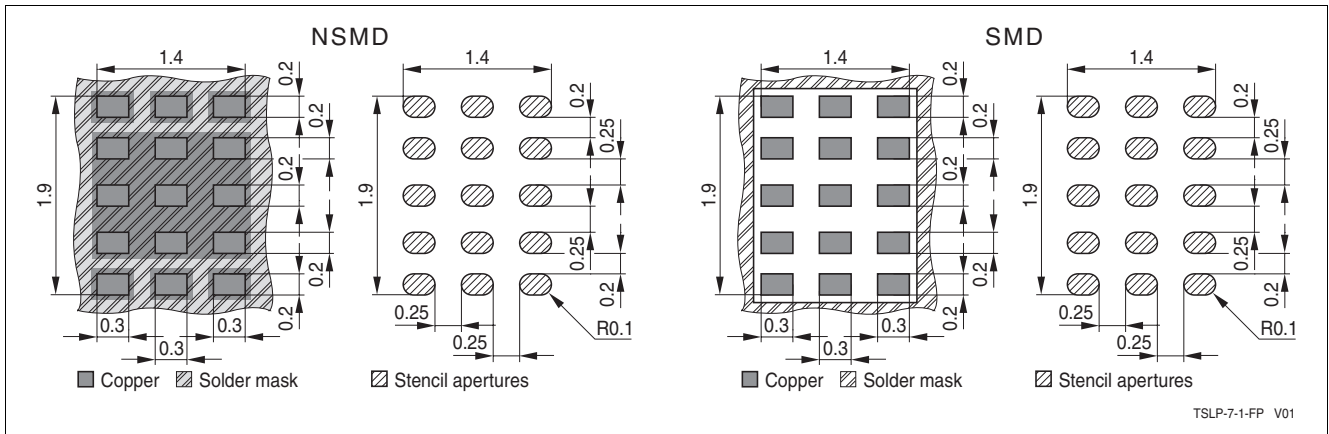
Recommended footprint and stencil layout for the TSLP-7-1 package
